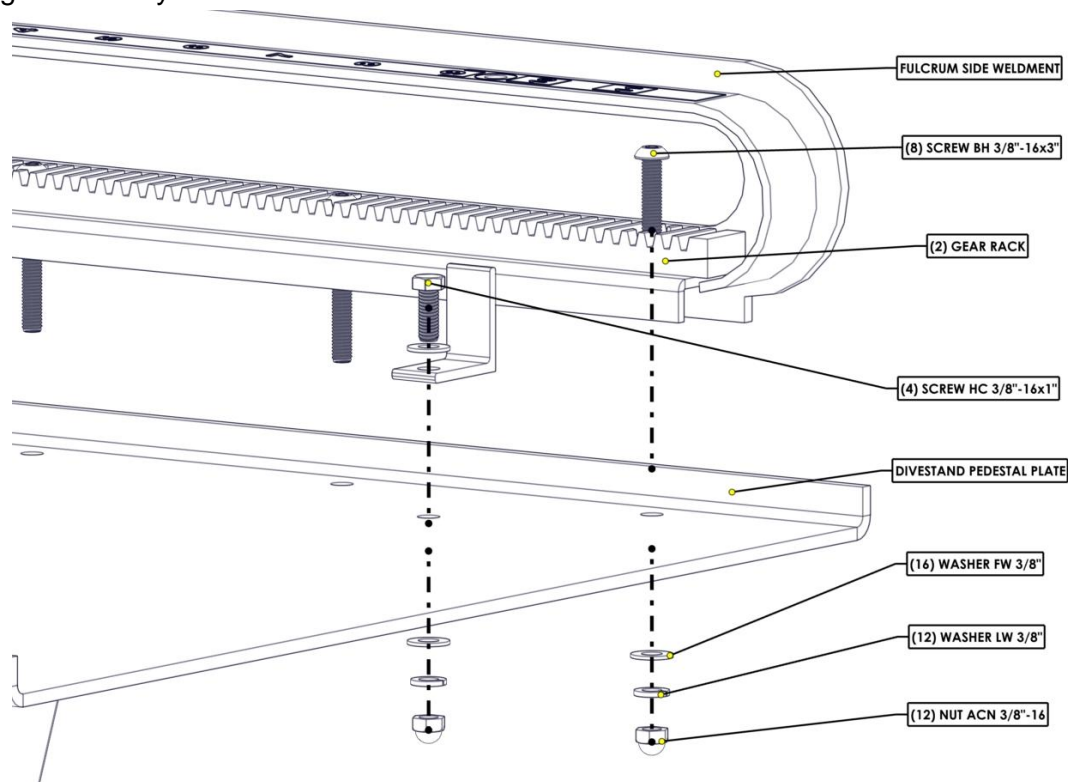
Figure F: Fulcrum Side Weldment & Gear Rack with associated hardware
